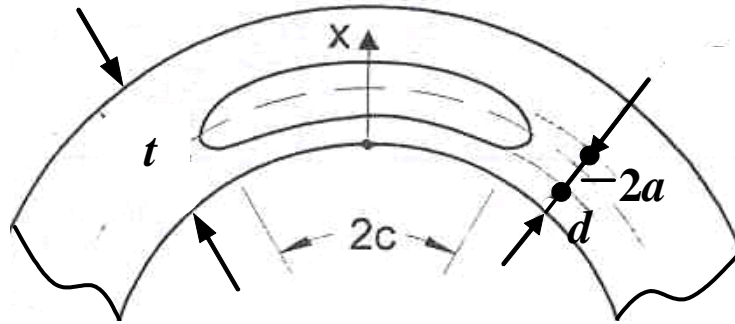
A girth weld with a buried defect and the relevant dimensions
